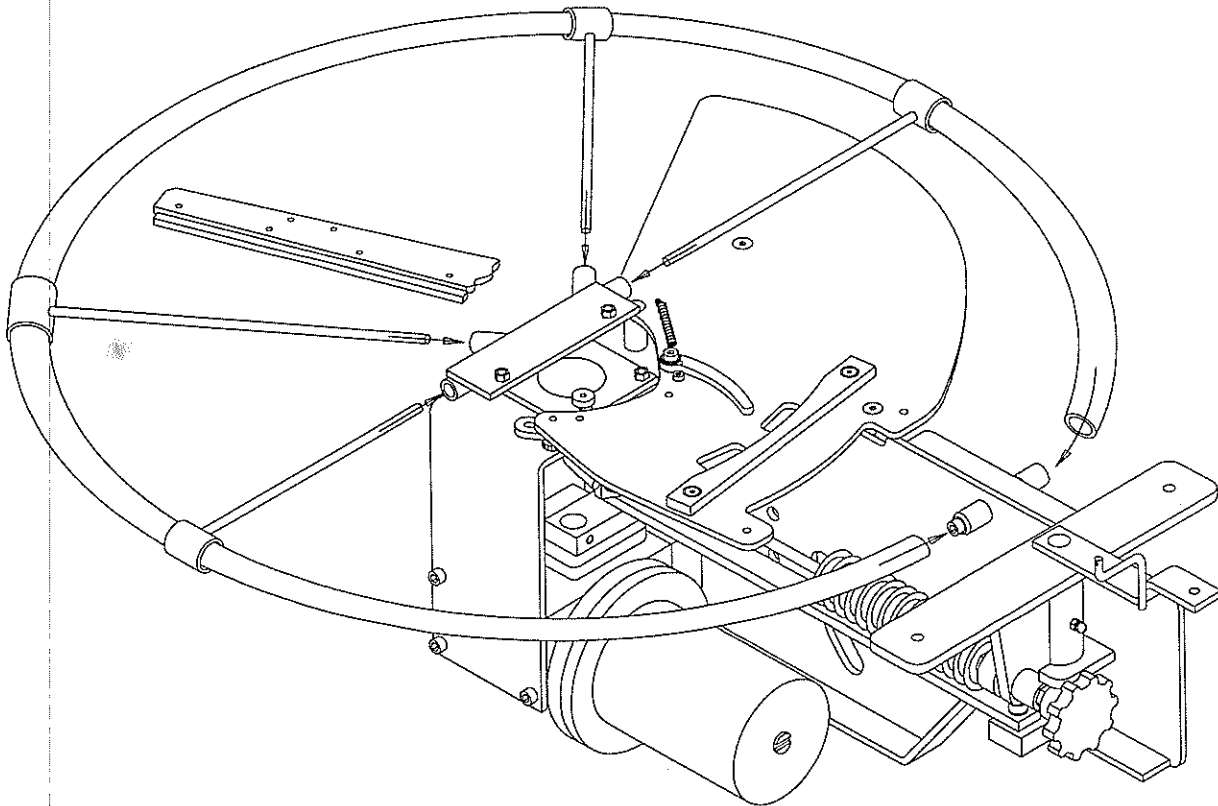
THROWING ARM PATH INDICATOR MOUNTING
